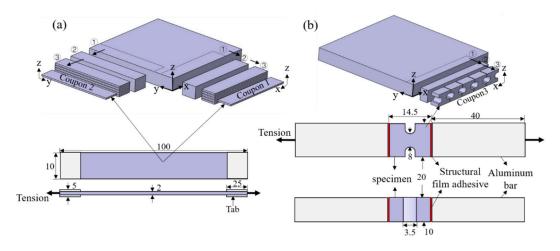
Coupon definition and dimension for the tensile test at (a) x-, y- and (b) z-directions.
